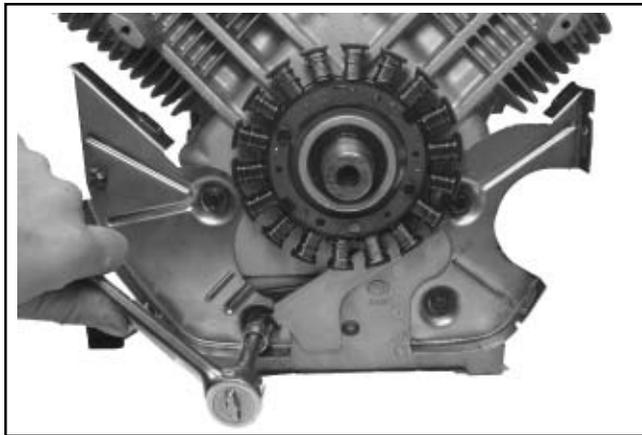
Removing Backing Plates and Stator Wire Bracket.
